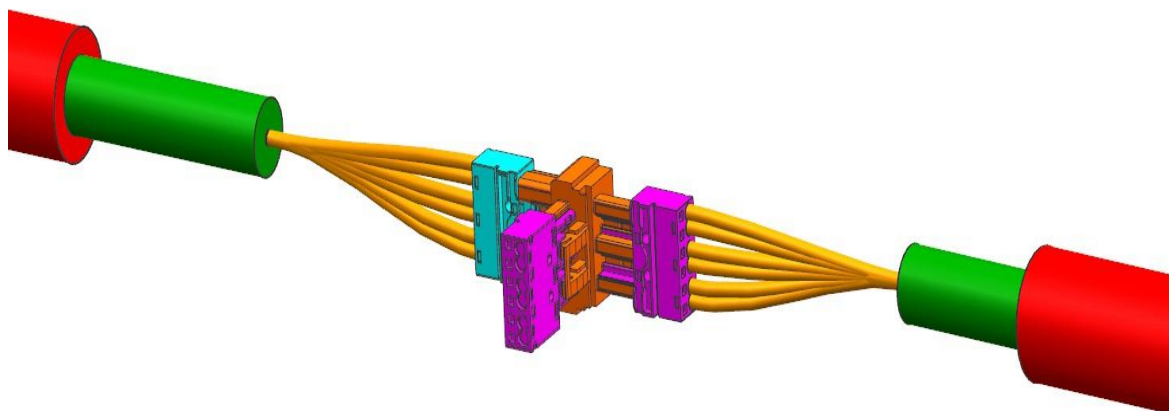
Wago model re-pin de-pin type connectors and cable layout
